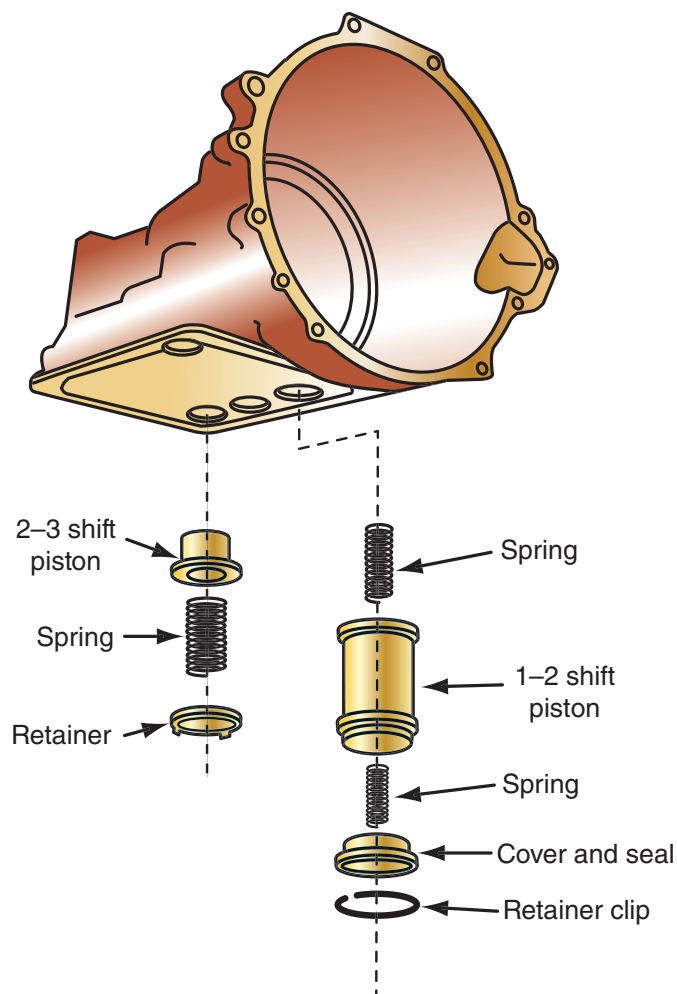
An accumulator assembly is used to control shift feel.
